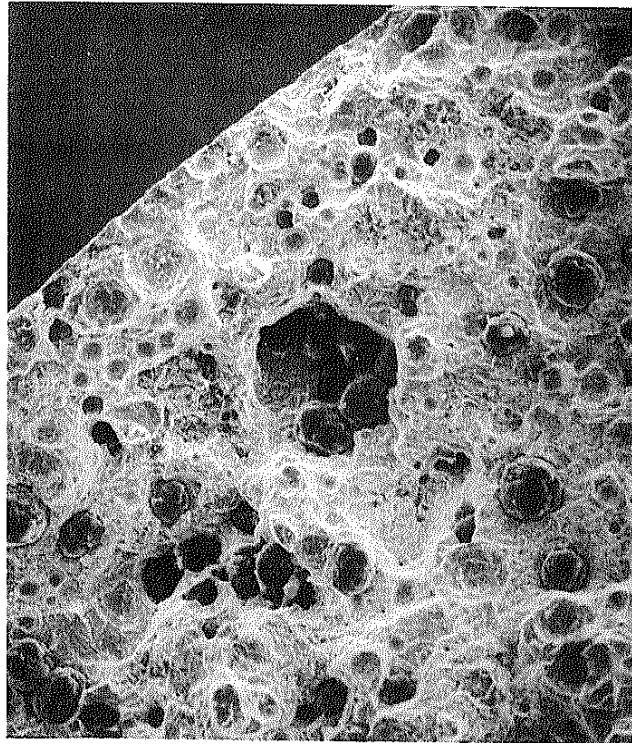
INITIATION POINTS OF FATIGUE CRACKS
